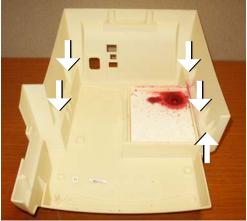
Base Pan Mounting Screw Figure 5-12 Side Deck Mounting Screw Locations. Chassis Removed for Purpose of Illustration.
